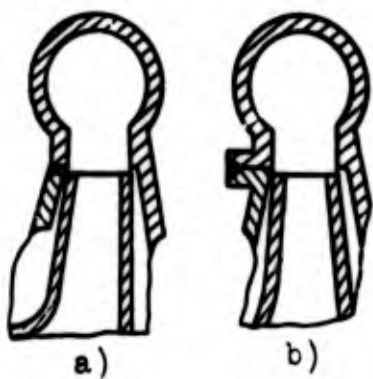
Housings of pumps: a) with welding of the joint; b) with welding by flanging.
